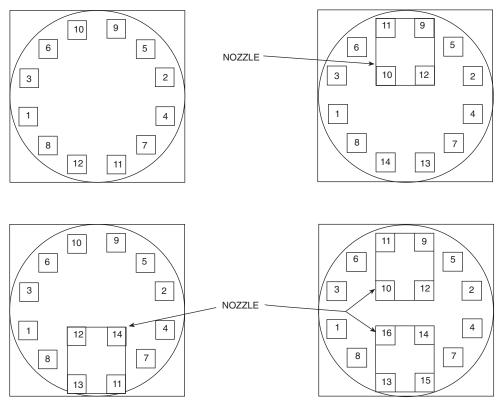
Cooler and Condenser Head Recommended Bolt Torque Sequence
